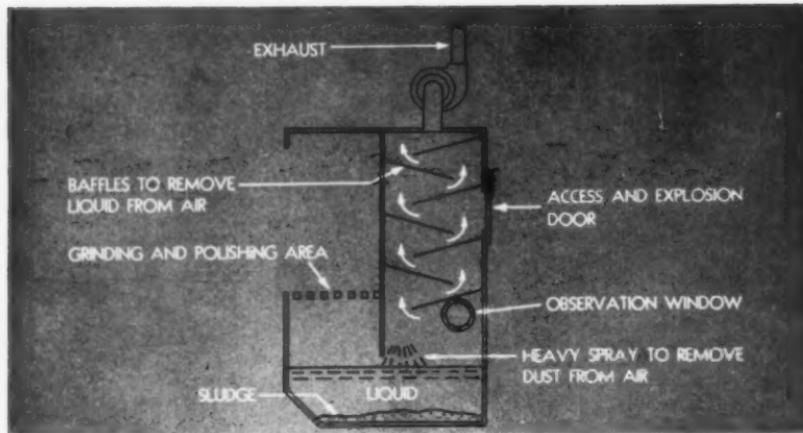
Recommended type of dust collector for grinding or polishing booths.
